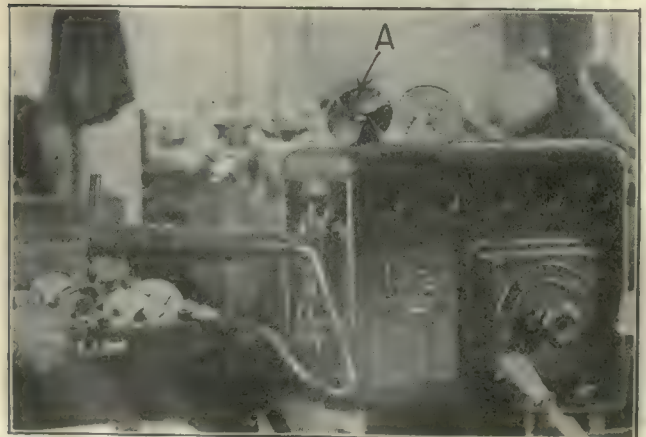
SPOT WELDING VANES ON FANS
